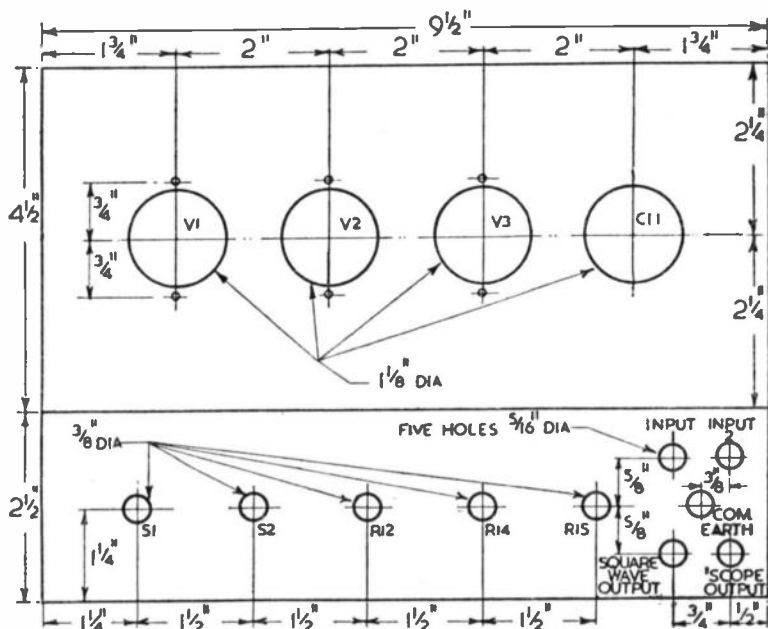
CHASSIS LAYOUT OF THE ELECTRONIC SWITCH (TOP VIEW)
